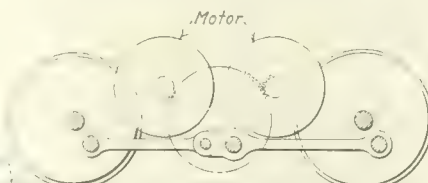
TYPE 3. ROD DRIVE WITH GEARLESS MOTOR
